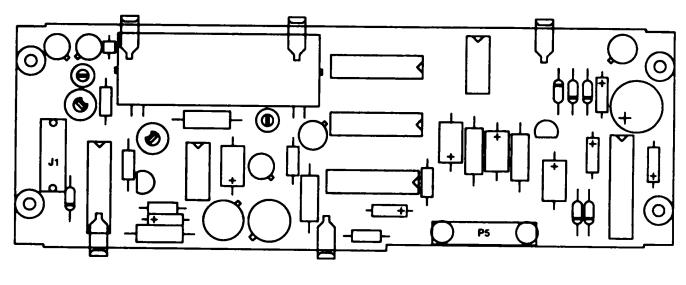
A5A1 Second and Third Converter PWB Assembly Component Location Diagram (10303-2610 Rev. B)
